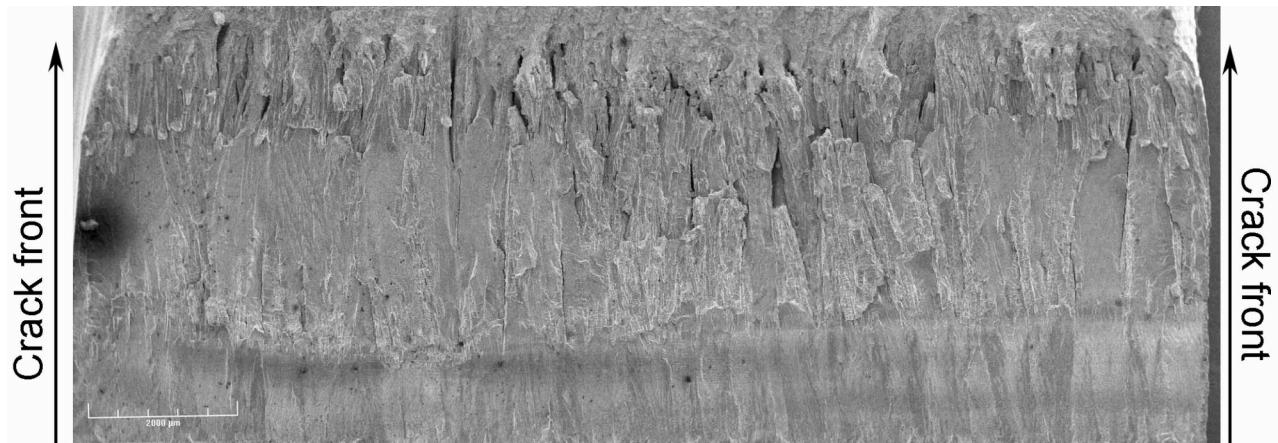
Crack front on fracture surface of sample CT933-TS.
